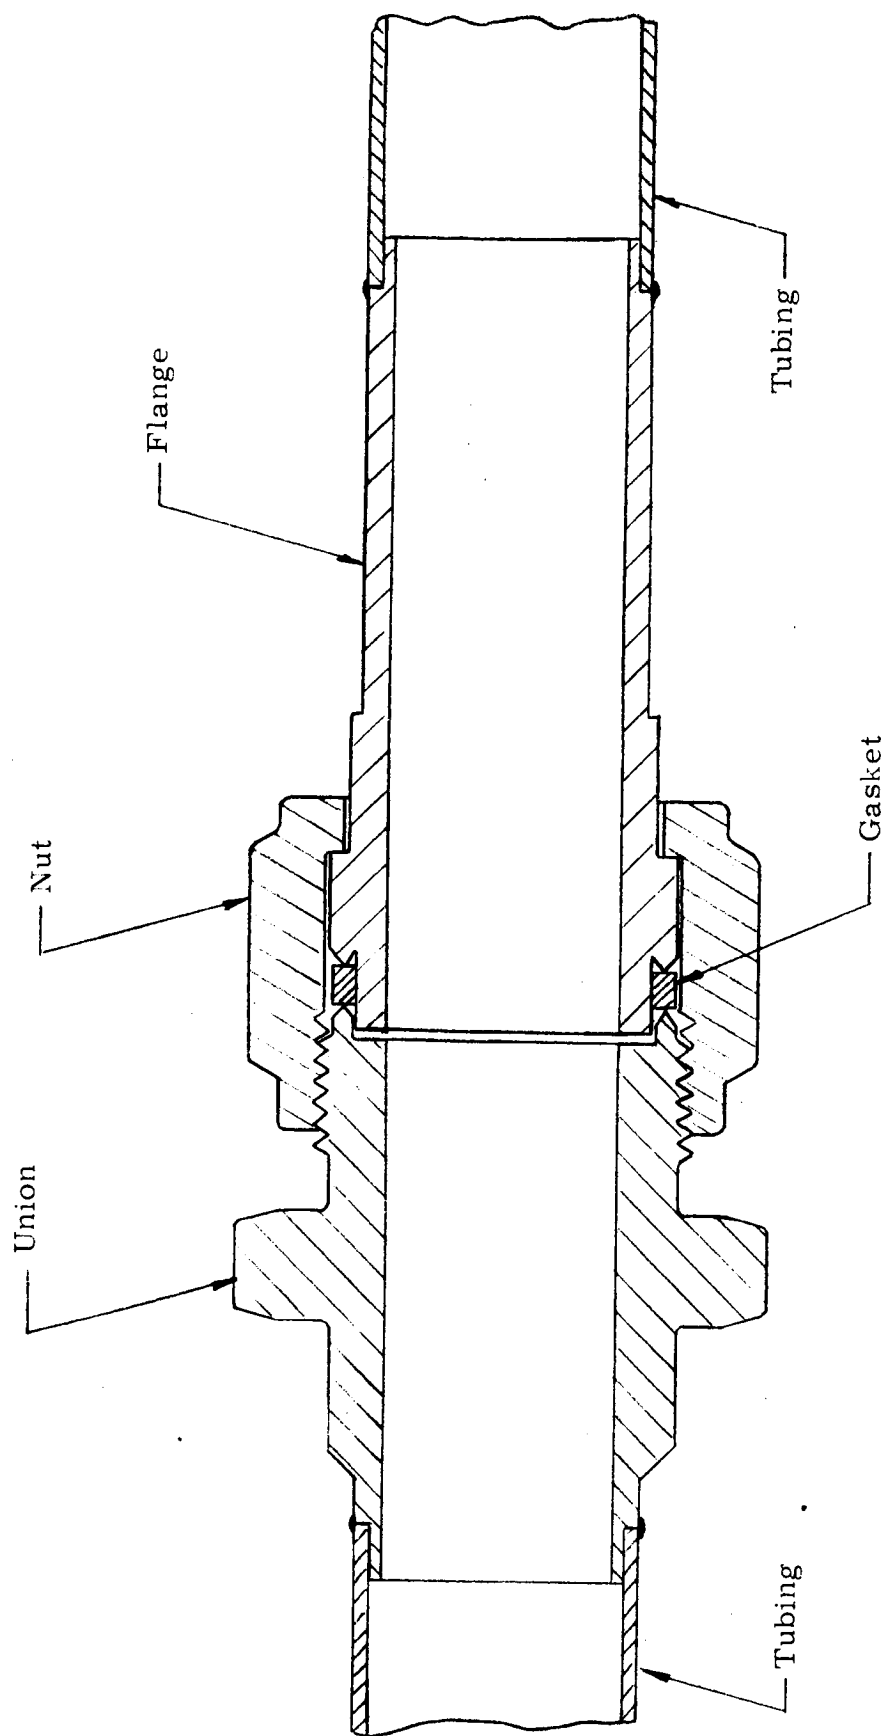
WELDED KNIFE-EDGE CONNECTOR
